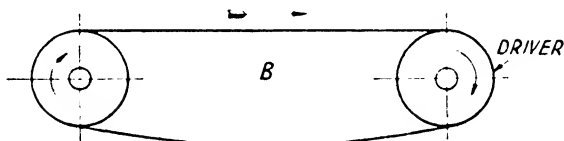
INCORRECT METHOD OF BELT DRIVE
